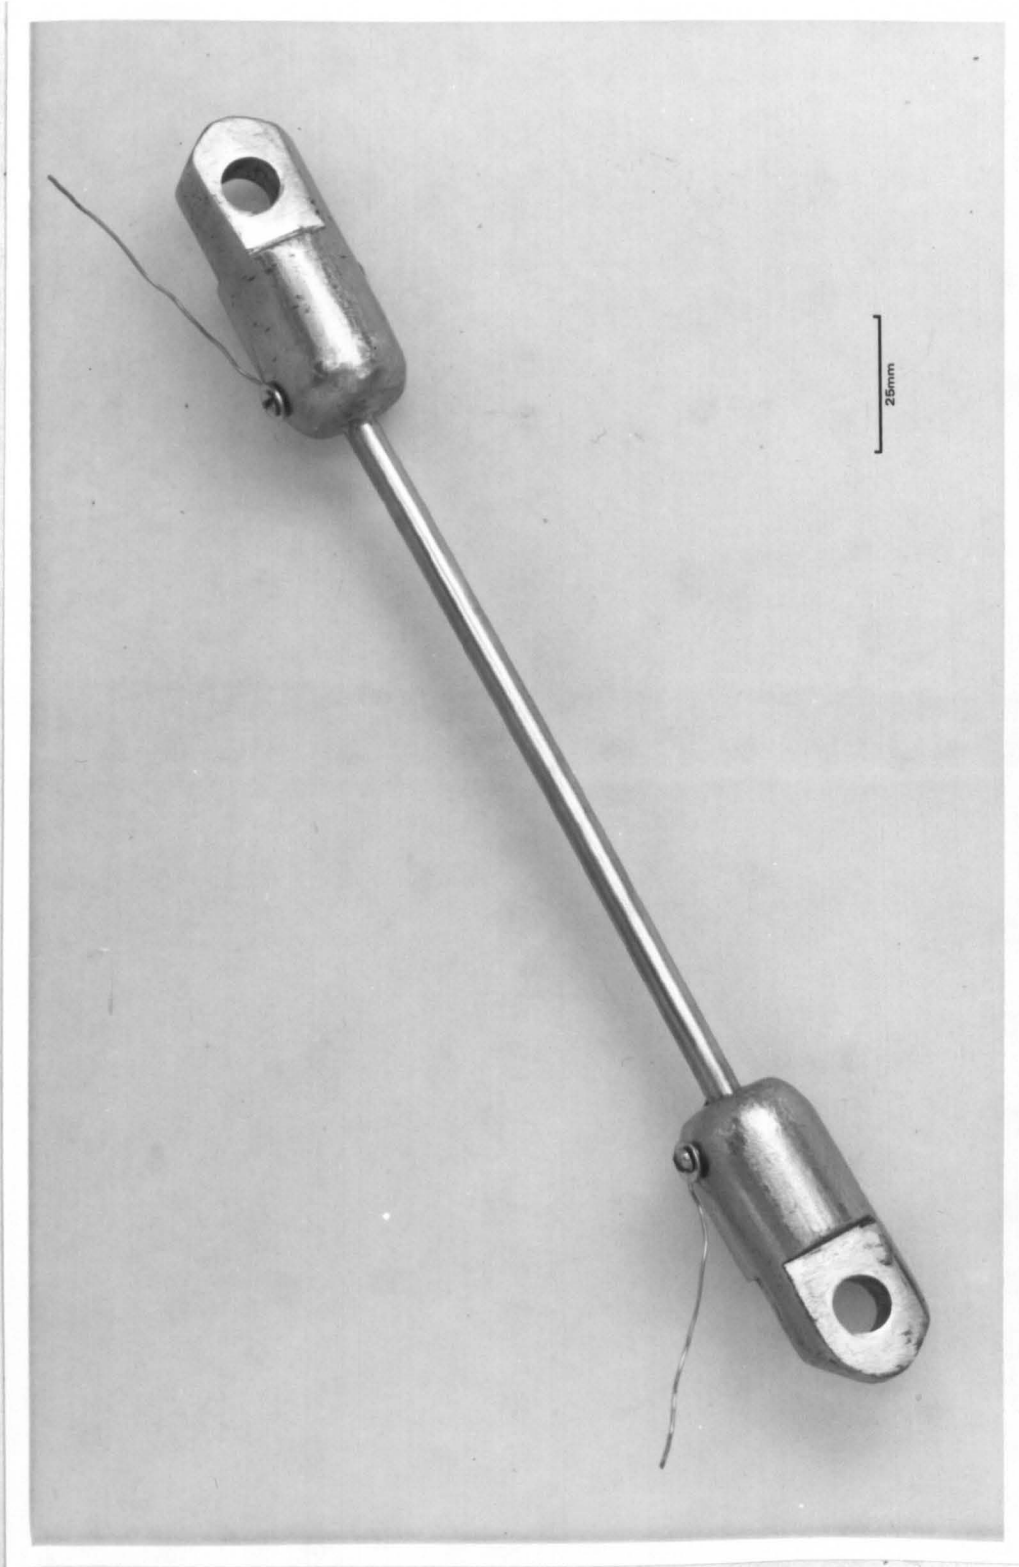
SPECIMEN ASSEMBLY WITH BRAZED ENDS - METHOD 'A'
